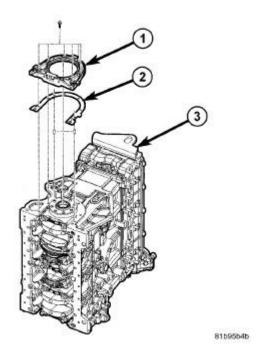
Rear Oil Seal Carrier, Rear Oil Seal Carrier And Gasket & Engine Block Courtesy of CHRYSLER LLC
